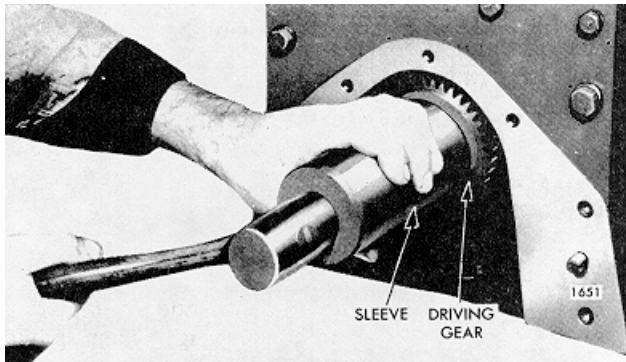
Installing Oil Pump Driving Gear on Crankshaft
